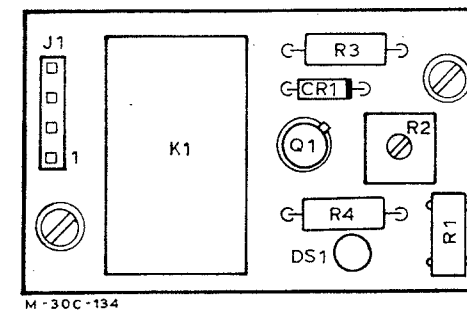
Assembly Detail - Overvoltage Protection Pcb (P/N 149-8098) and Transient Clipper Assembly (P/N 149-8122-1)
